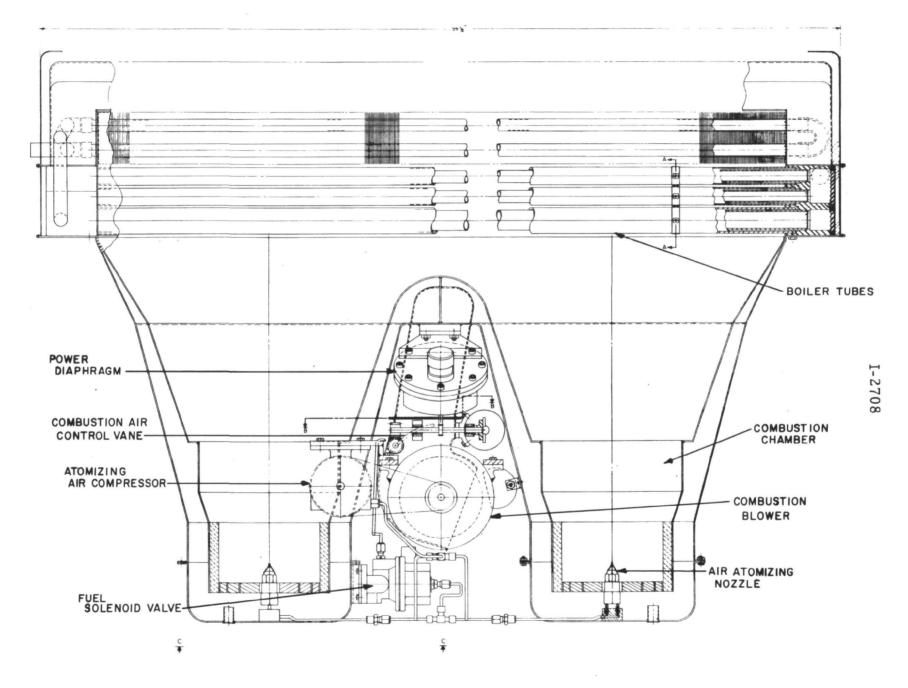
Front View of Combustion System-Boiler Subassembly
